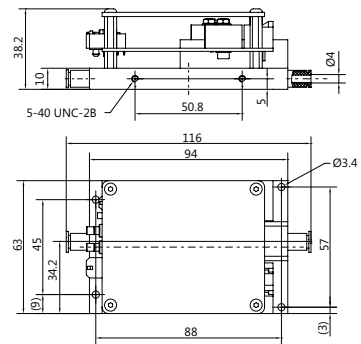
Outline drawing of DP-SP series driver with general purpose pad
